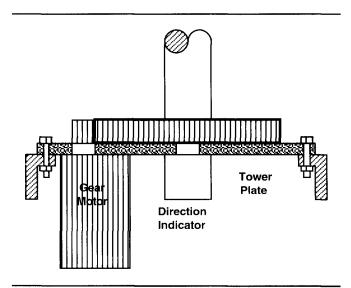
A more reliable rotator design would connect the output gear directly to the mast or the mast shock isolator.
